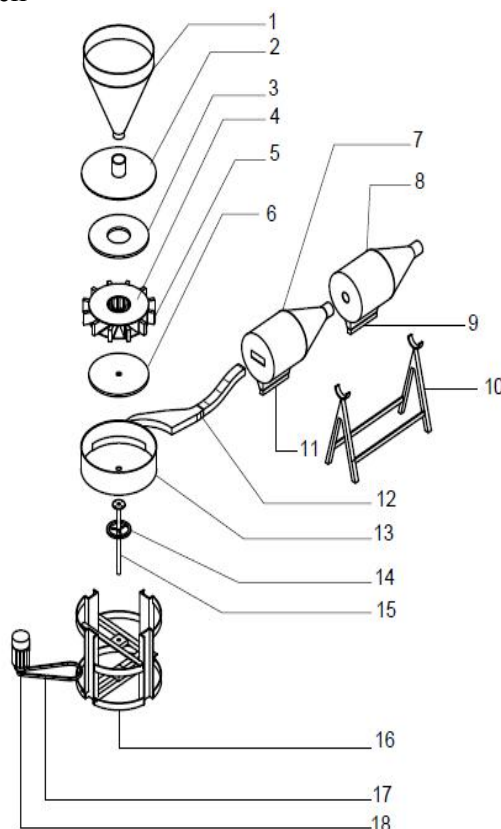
Exploded View of the Completed Melon Shelling and Cleaning Machine:
